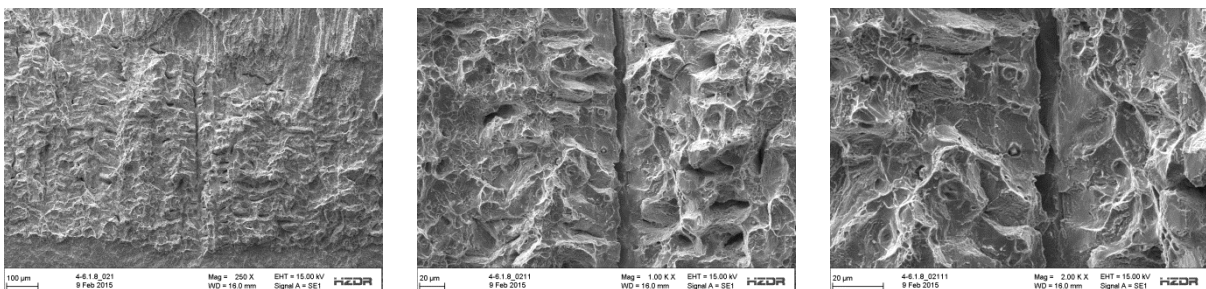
SEM images of fractured surface the SE(B) specimen 4-6.1.8 (2nd layer of the cladding from the beltline welding seam SN0.1.4.) tested at -100 °C.
